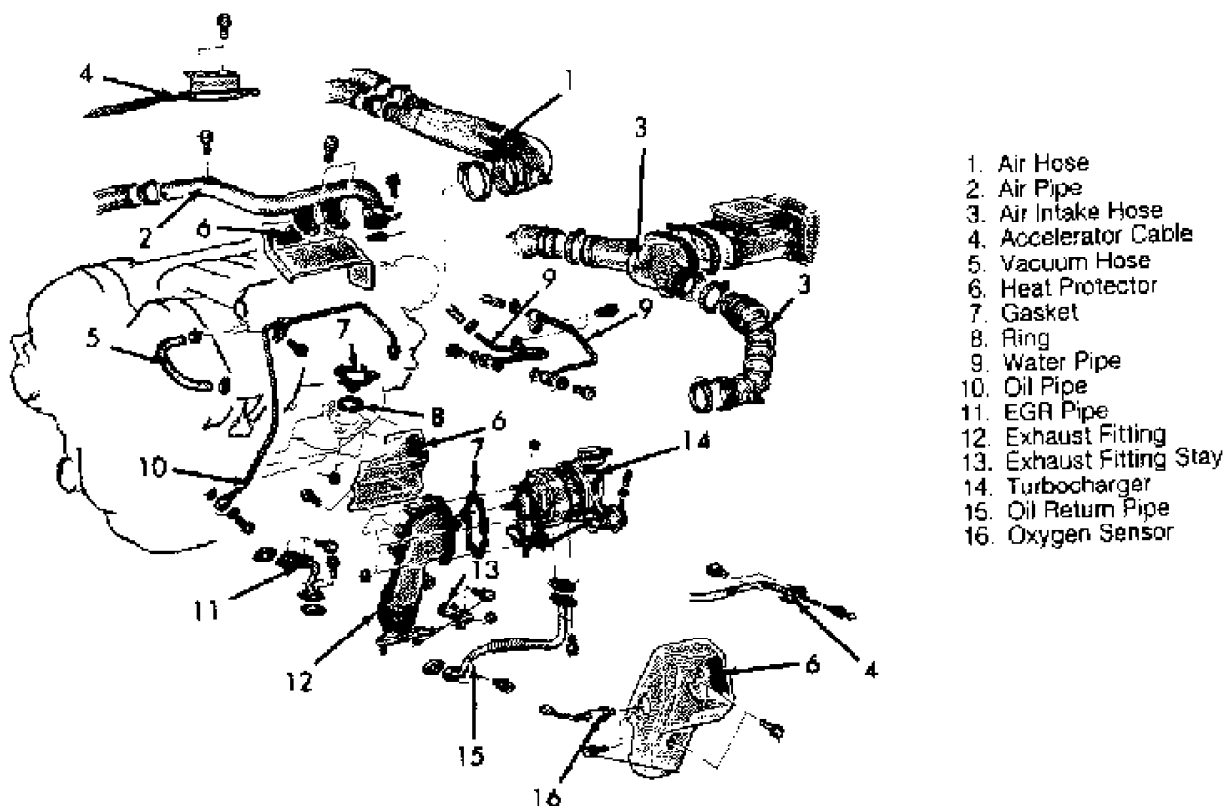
Removing Rear Turbocharger (Stealth & 3000GT)
